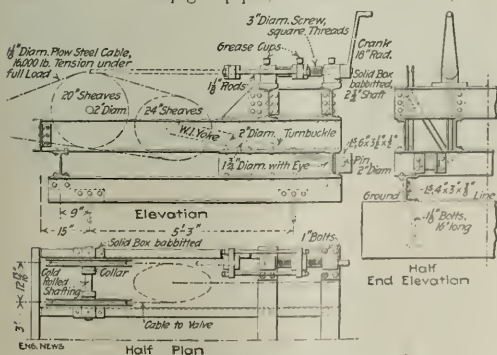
DETAILS OF SHEAVE CONTROL OF INTAKE AT
